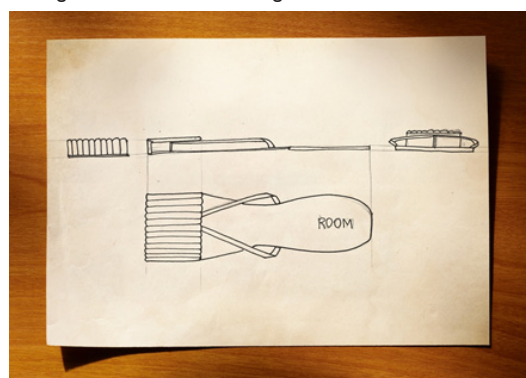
Prototype of a Pillow sandal, reinforcing the design concept.
